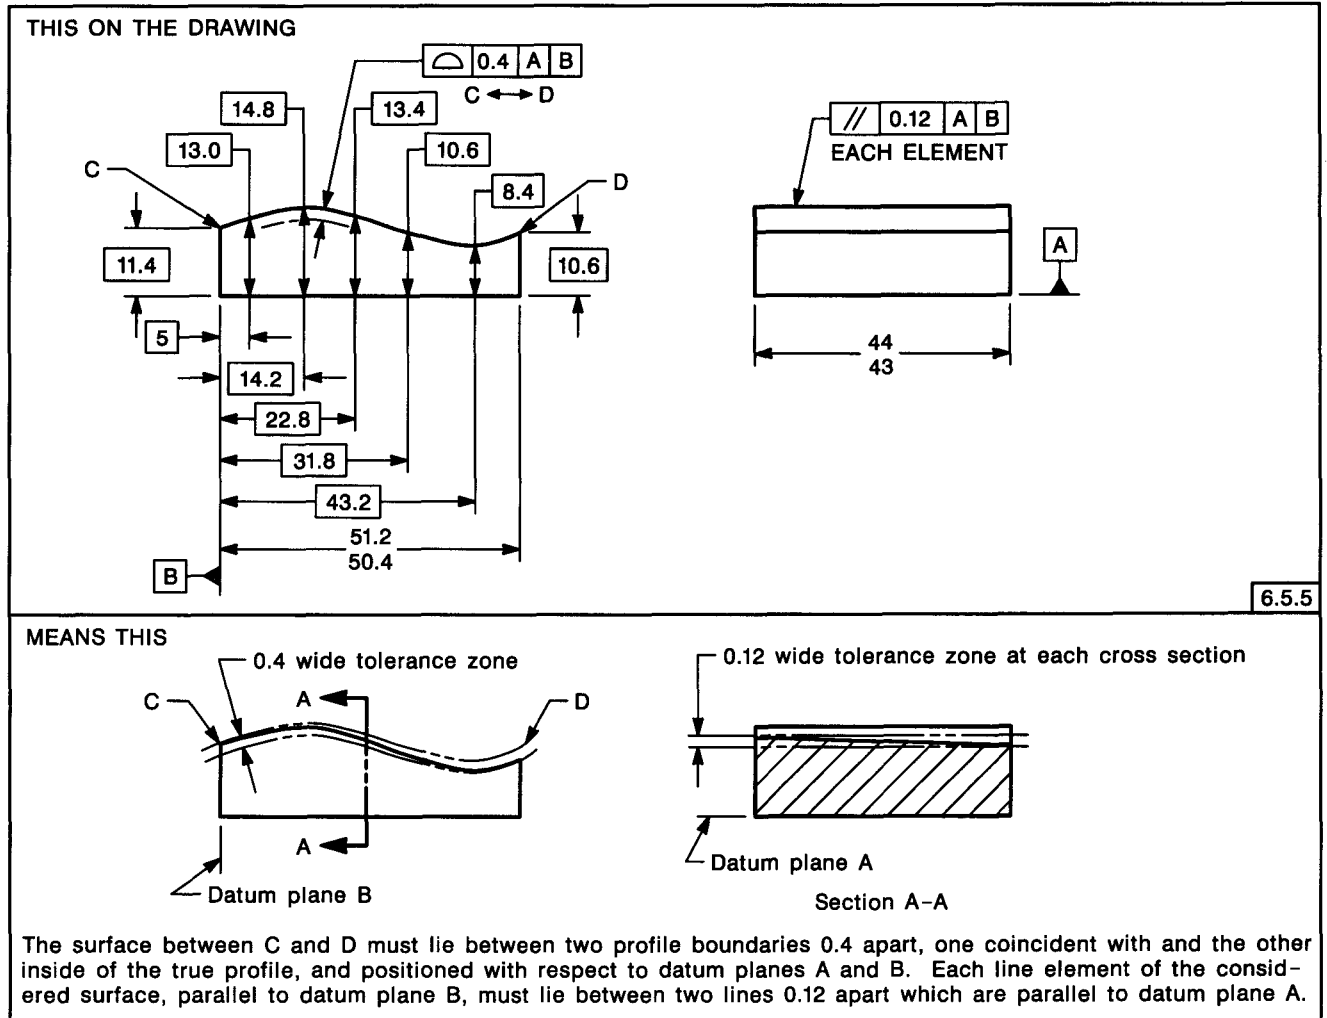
SPECIFYING COMBINED PROFILE AND PARALLELISM TOLERANCES
